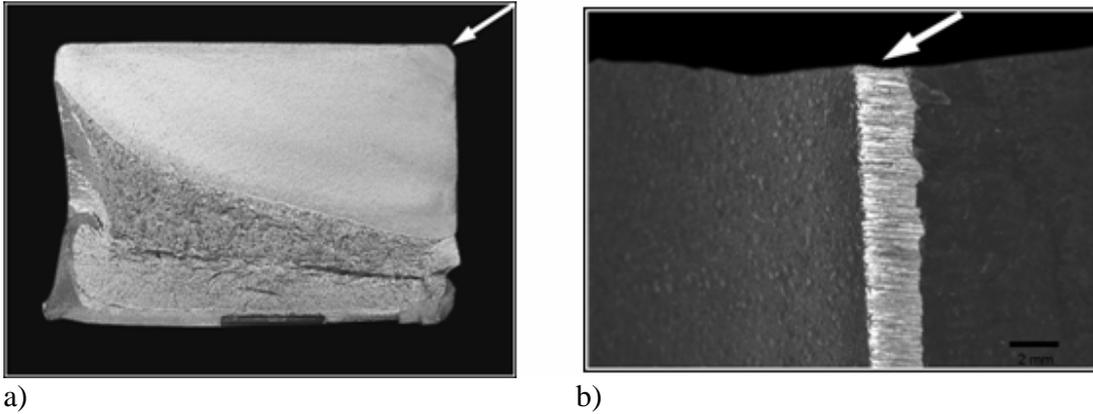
Typical start location for the fatigue crack. a) fracture surface, b) grinding grooves perpendicular to the length direction..
